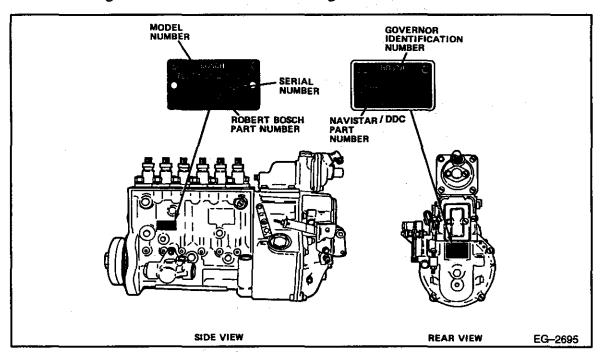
The Injection Pump Housing I.D. Plate and the Governor I.D. Plate
